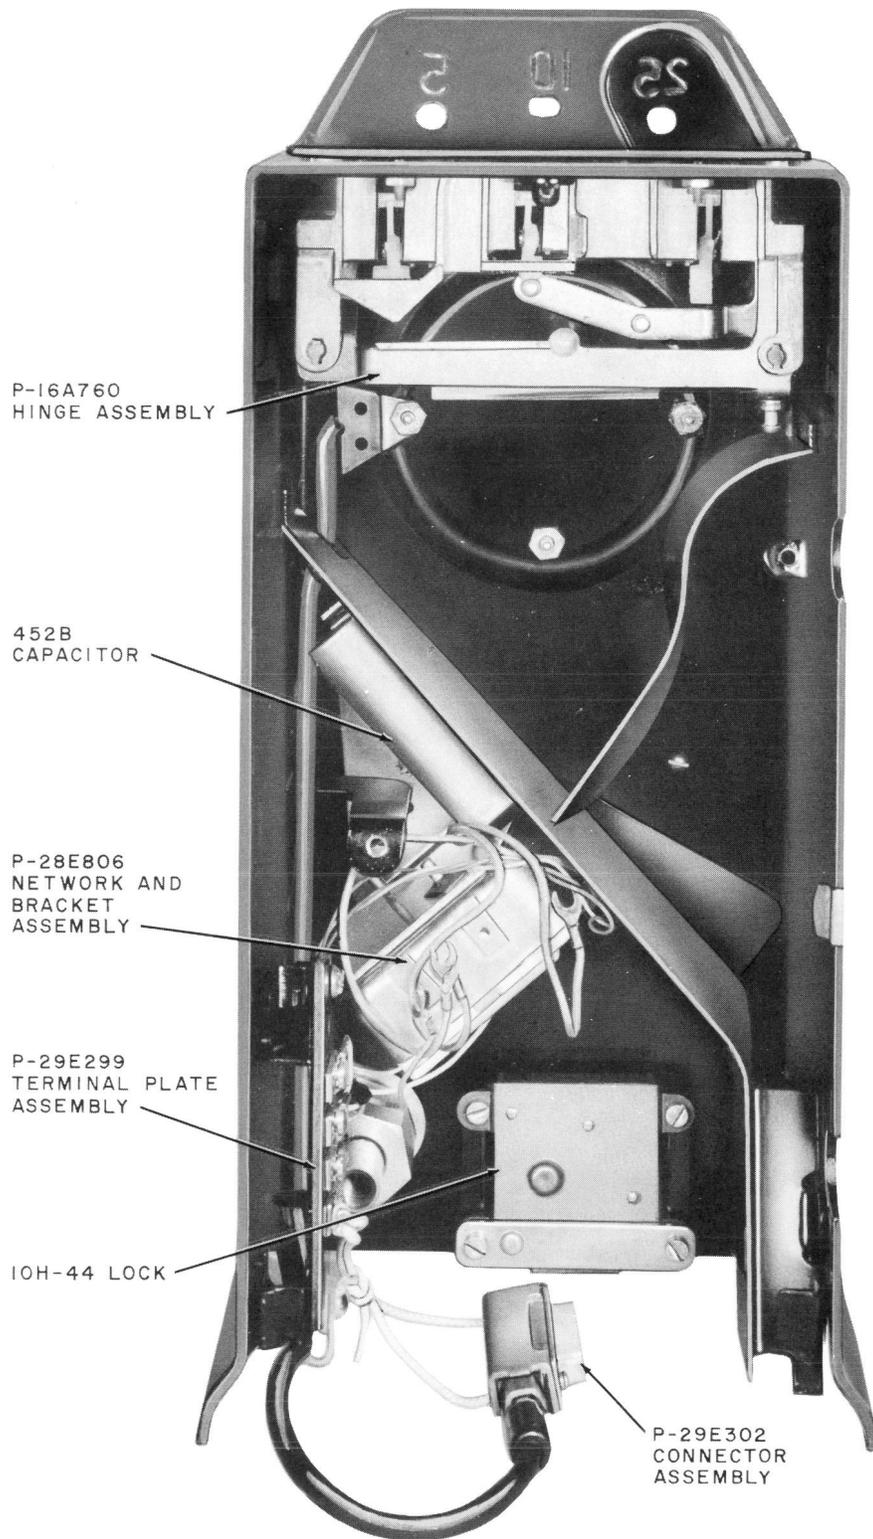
Upper Housing With Gong Signal and Chute Assembly Removed
